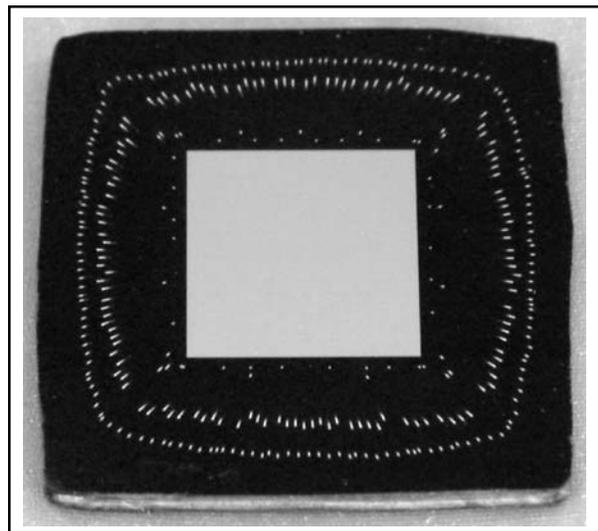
Polished BGA die in the original package ready for die attach and wire-to-wire bonding in a new package
